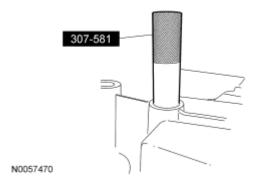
Installing New Manual Control Lever Shaft Seal Using Special Tool (307-581) Courtesy of FORD MOTOR CO.
